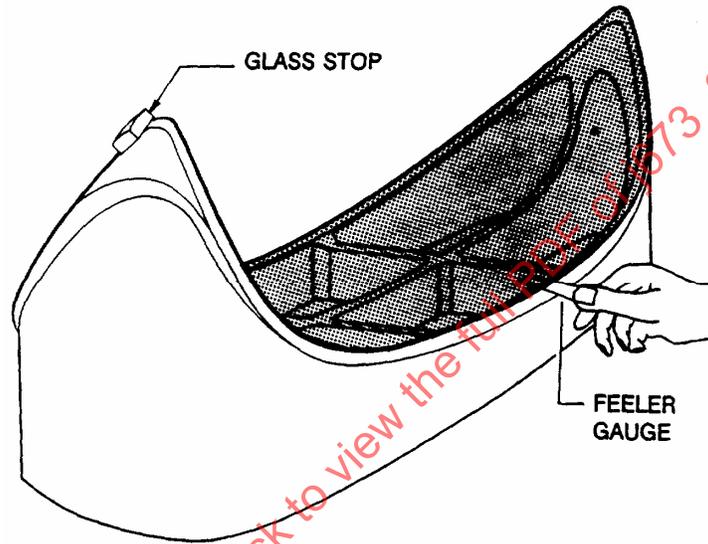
CONCAVE-TYPE CHECKING GAUGE
